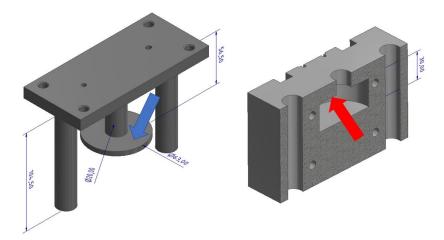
On the left, moving part of the cylinder. On the right side, half view of the still part of the cylinder. The arrows indicate the surfaces which should be selected for applying the constraint with movement.
